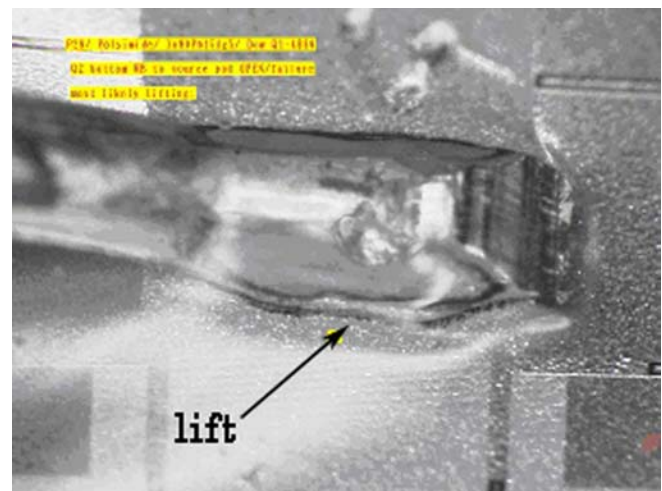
Top View of P029 Wire bond to Source Pad Lifting (175x)
